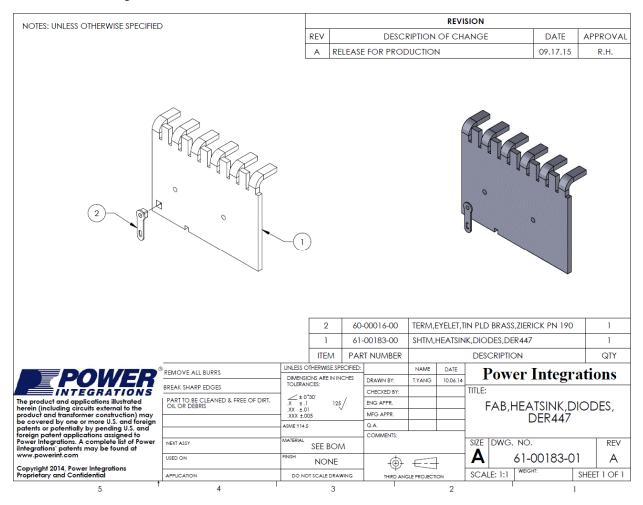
Finished Secondary Heat Sink with Installed Fasteners.
